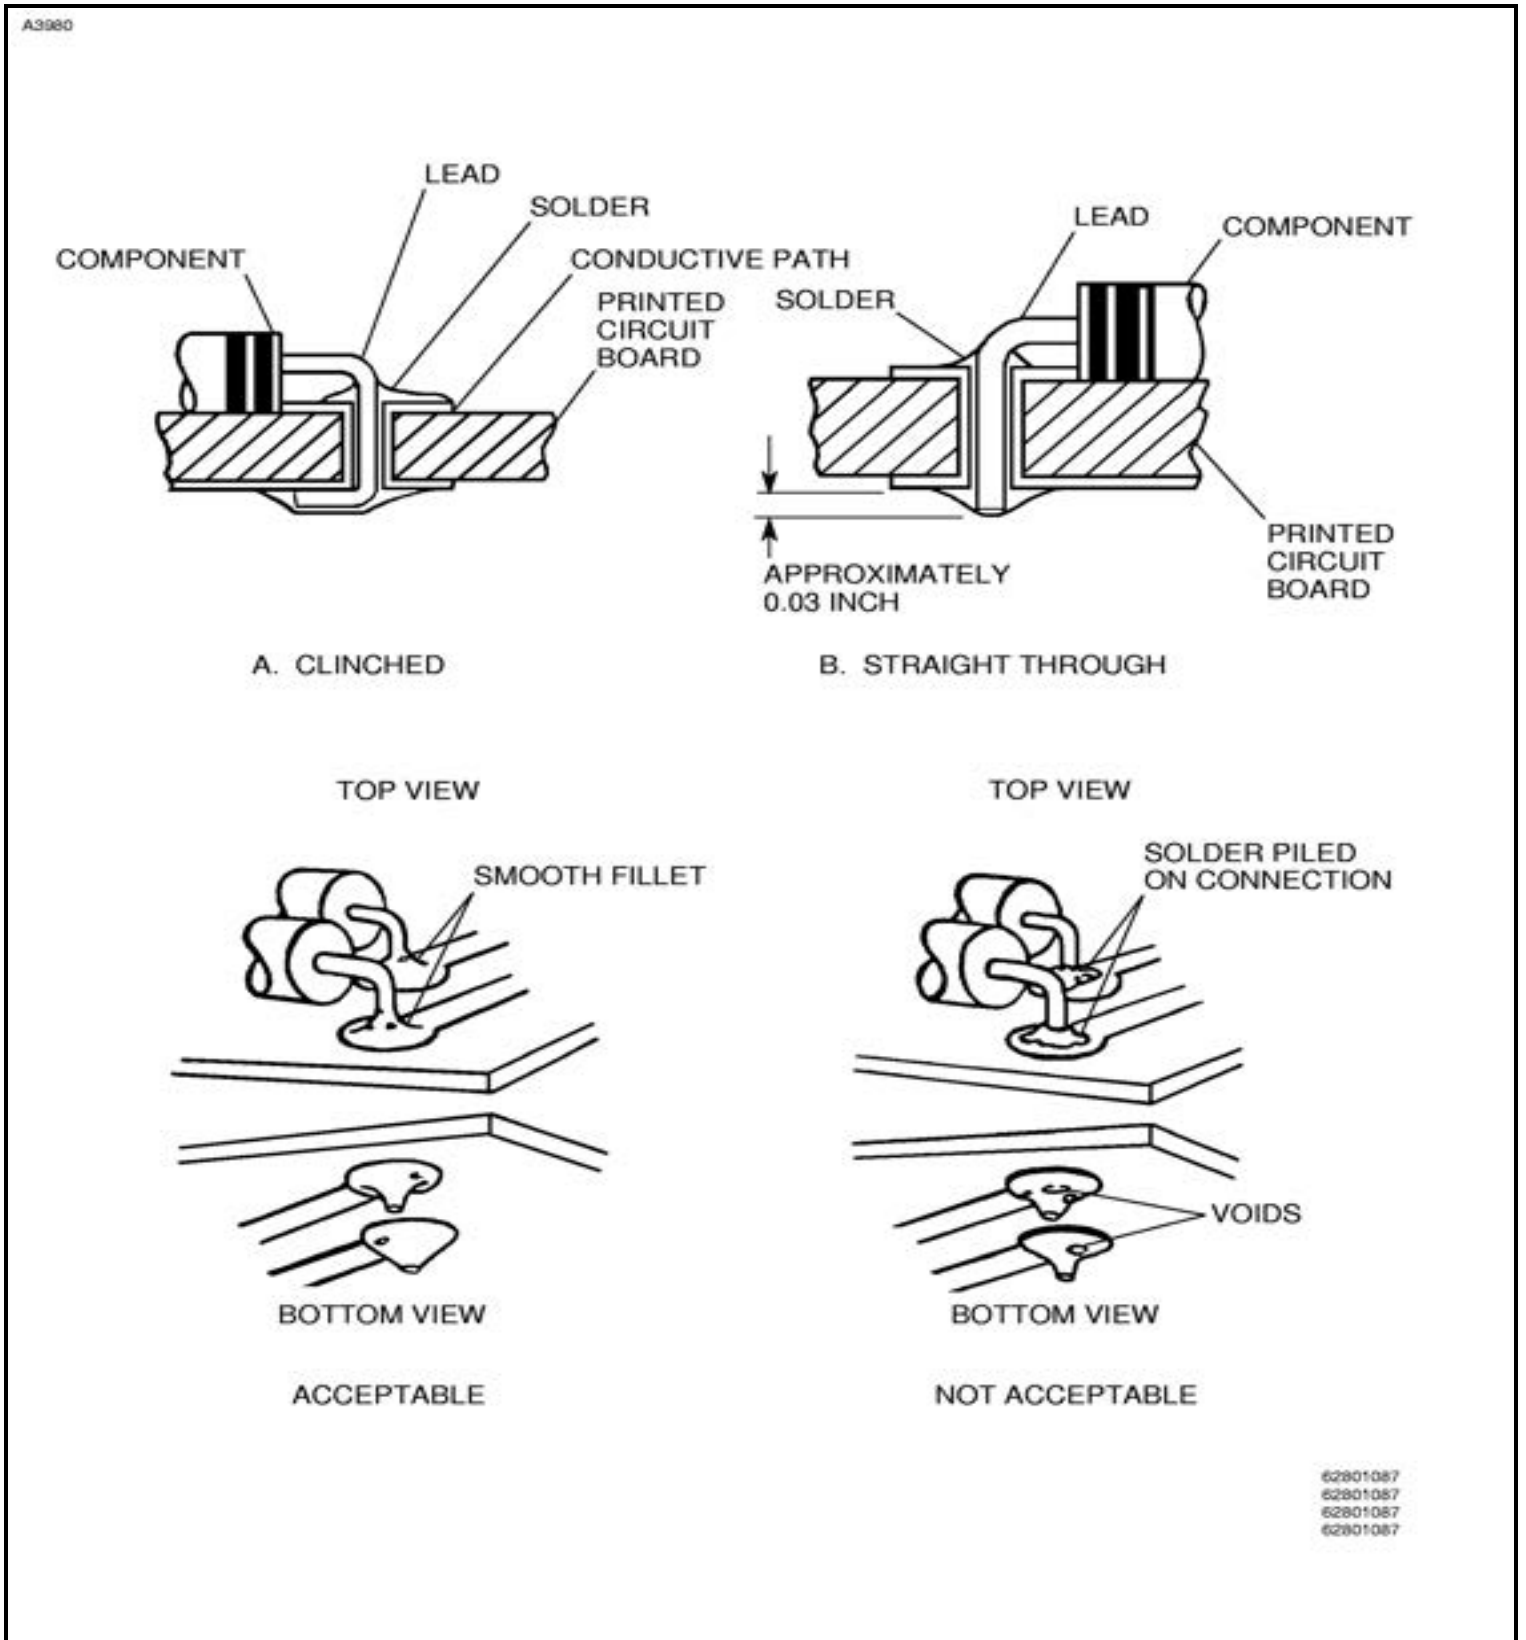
Sheet 1 : Soldering Printed Circuit Boards With Plated-Thru-Holes
